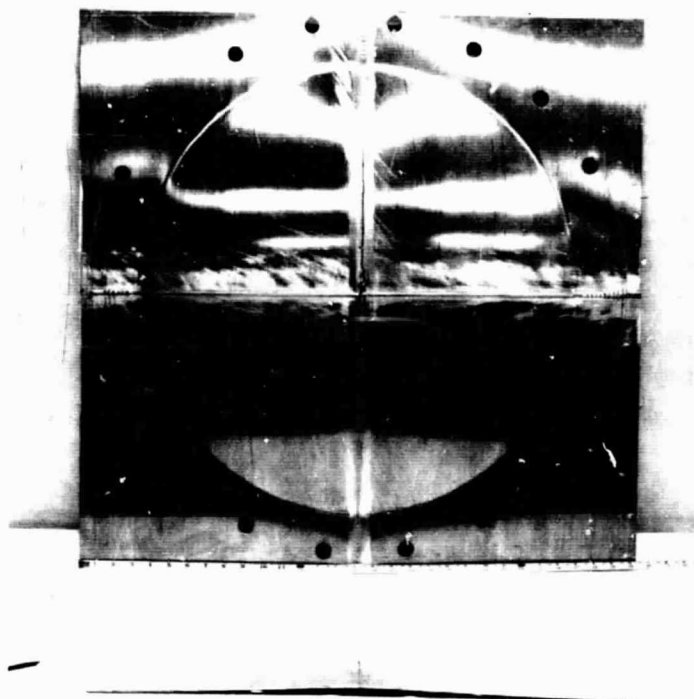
BULGE CONTOUR AND FRACTURE PATTERN OF PANEL CONTAINING CROSS WELD
